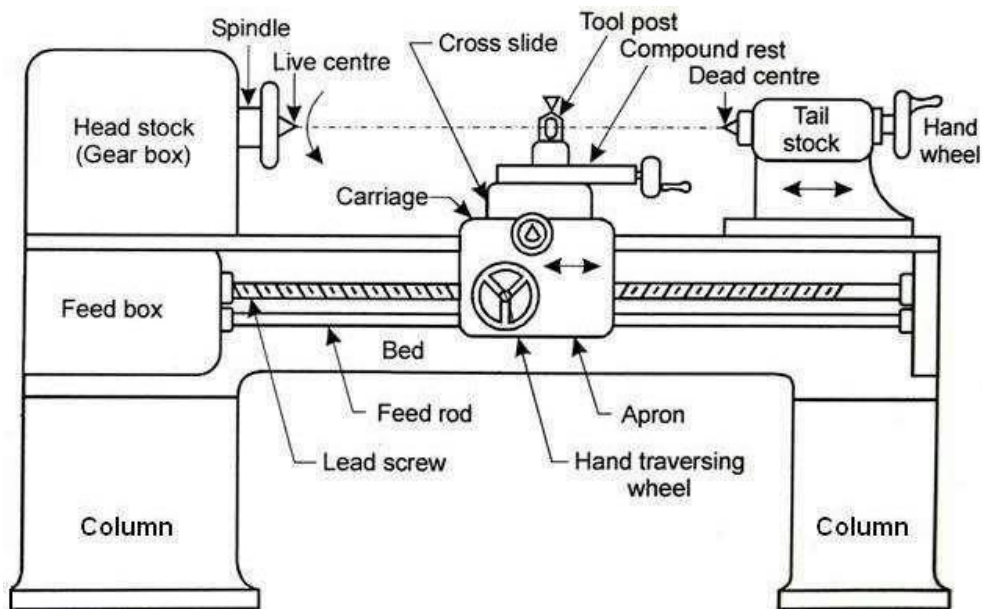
shows the basic configuration of a center lathe. The major parts are:
